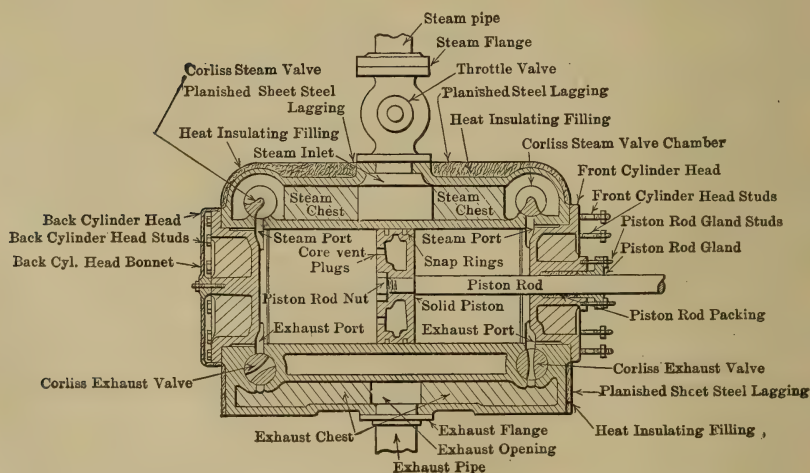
Section Through Cylinder; Typical Corliss Engine.
